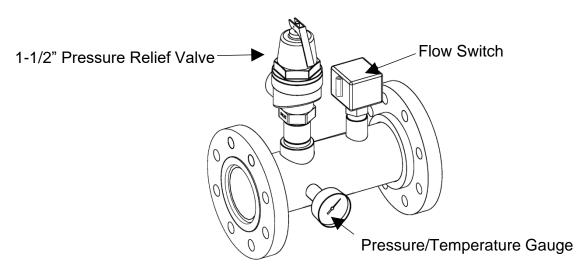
Manifold Assembly and Components for EXT 1500 2S, 2300 2S, 2600 2S & 3000 2S
